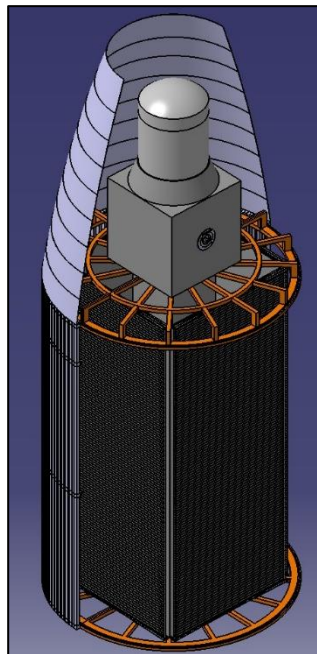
Electric power assembly with Fixtures (Orange) in Starship Payload
